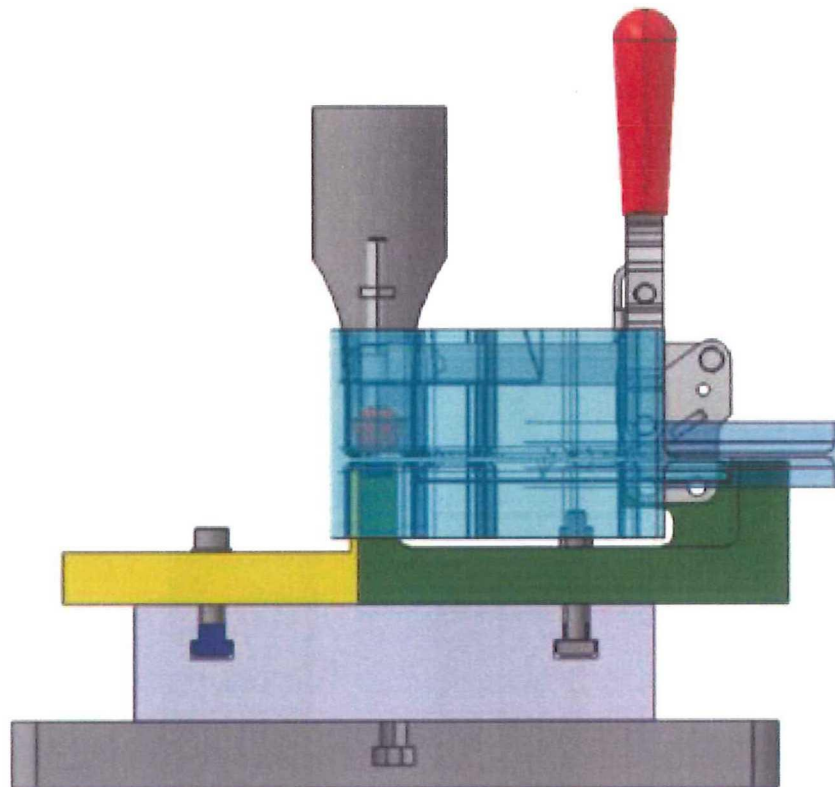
Side-view of the Z51430 fixture to weld the fuselage frame to the orthogrid panel.
